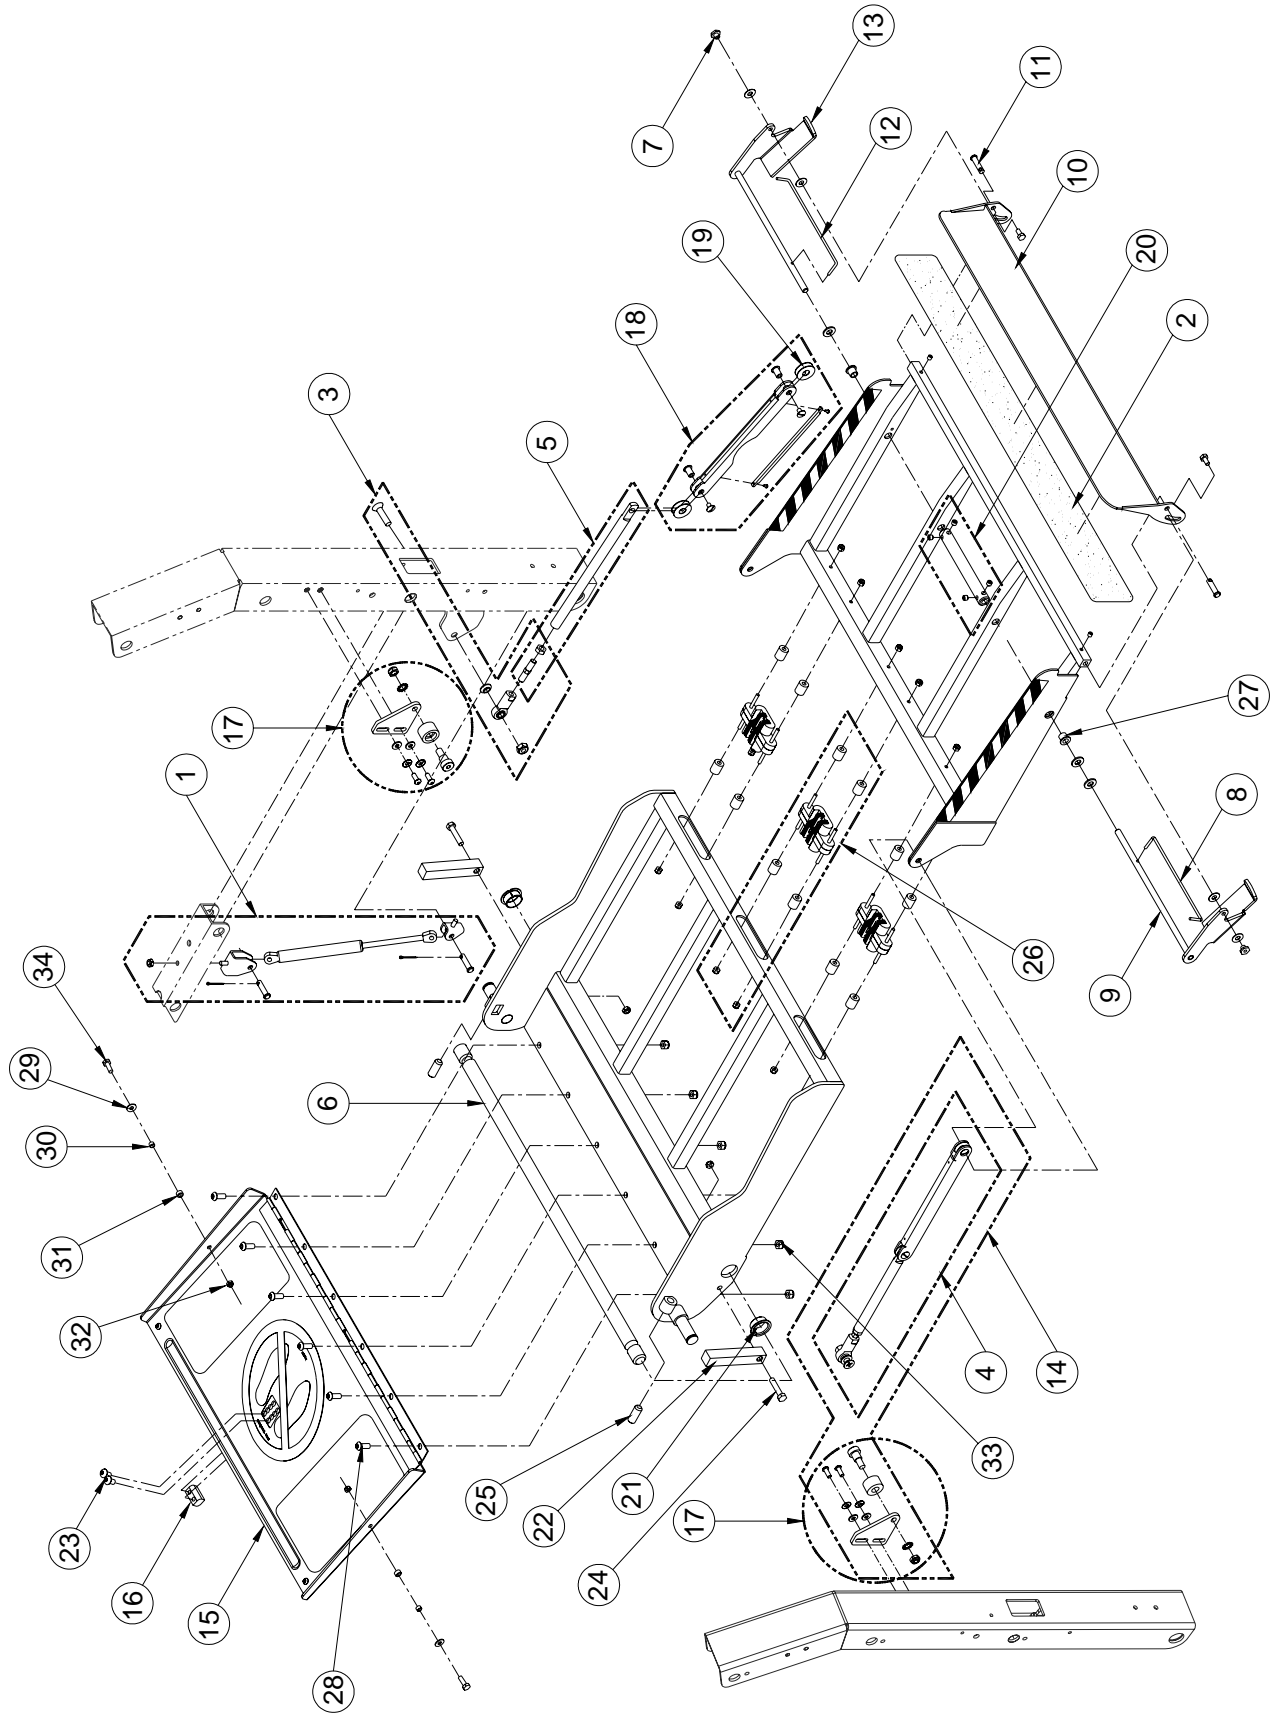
FOLDING PLATFORM ASSEMBLY, K1132
